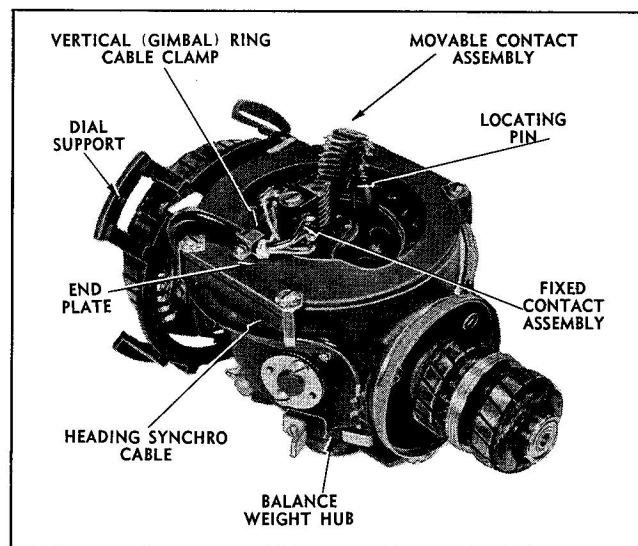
Vertical Ring Assembly Resting on Balance Weight Hub
